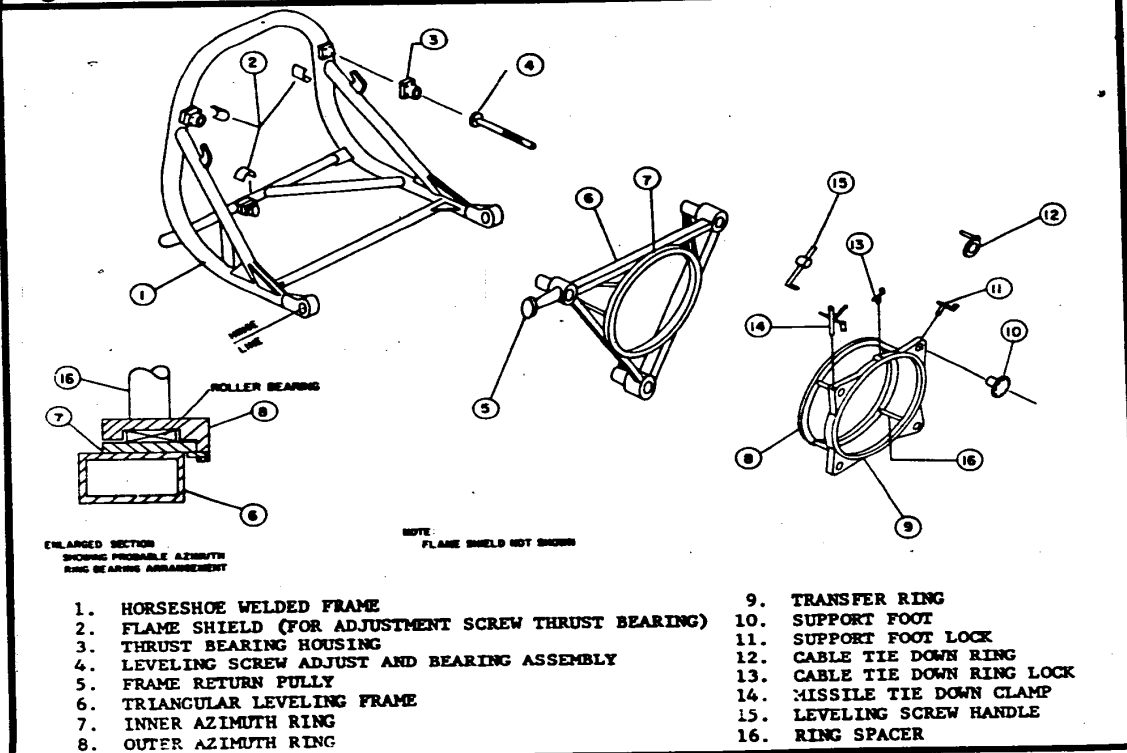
(CONFIDENTIAL) Exploded View of Firing Table Assembly (U)
